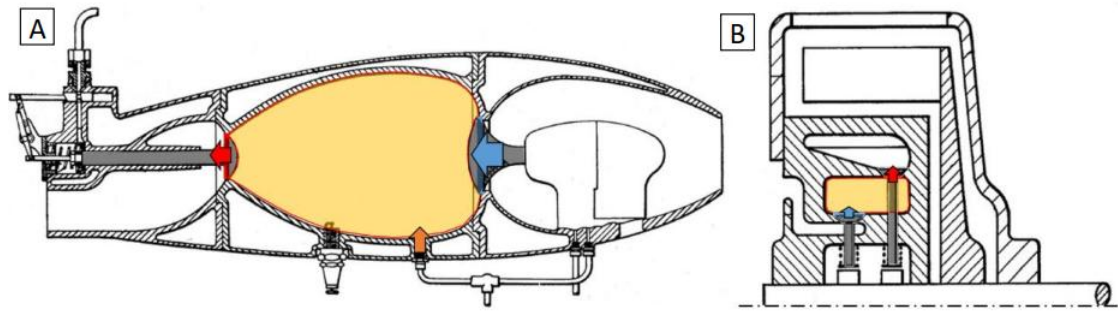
A: Sectional view of the CVCC by A.G. Forsyth (adapted from [33] [6] B: Sectional view of the CVCC by J. Semery (adapted from [34]) [6].
